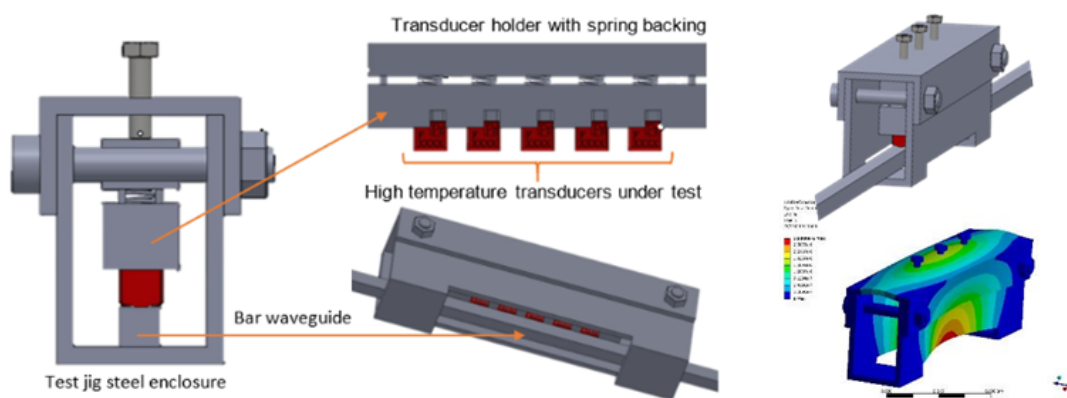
Test fixture for HT-UGW measurements of multiple transducers.
